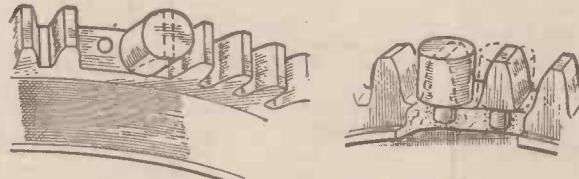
The method of fitting a new tooth in the barrel or centre wheel.
